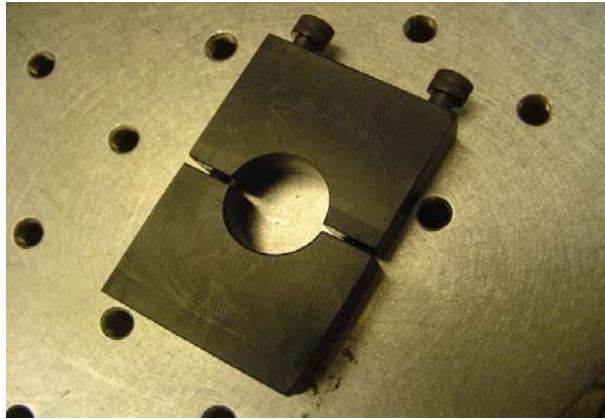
Mechanical Brake Provided for Applying Resistive Torque
